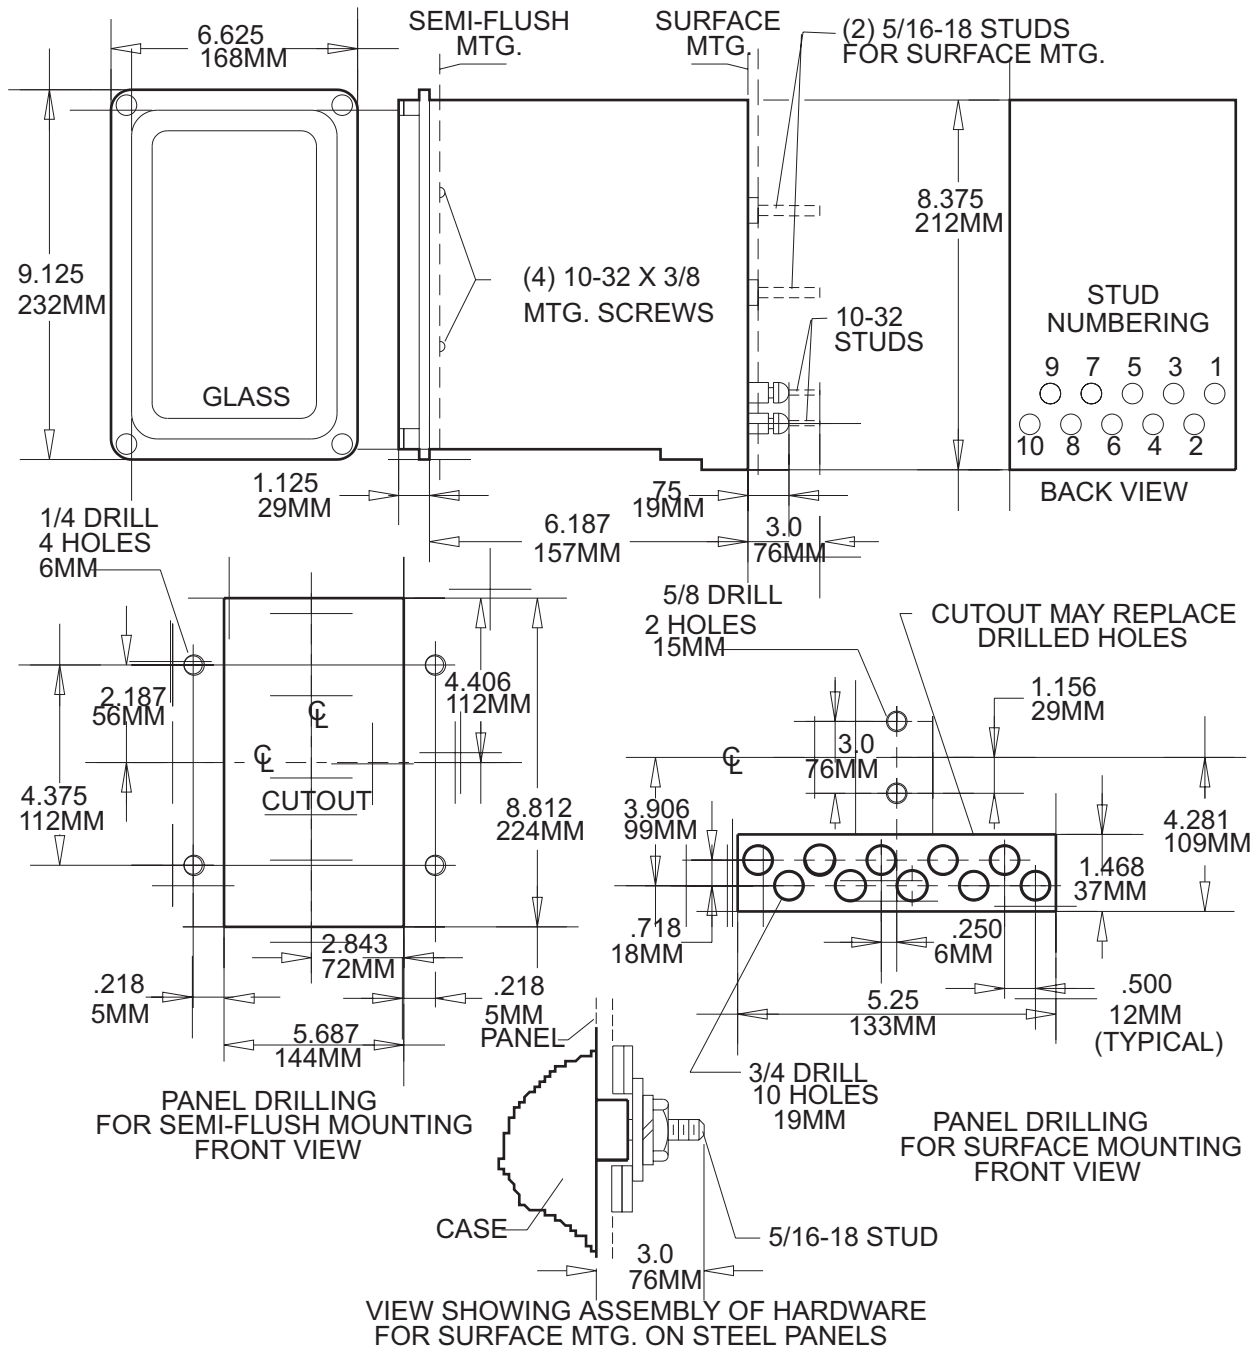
DIAC PANEL MOUNTING AND DRILLING
